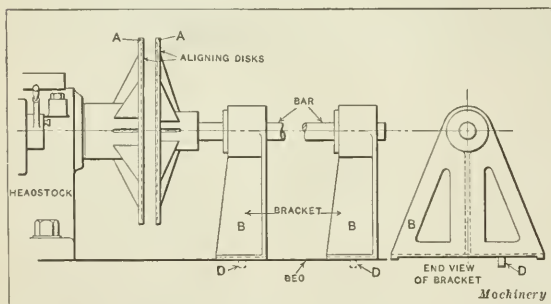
Spindle Aligning Tools used in testing Shell-boring Lathe
